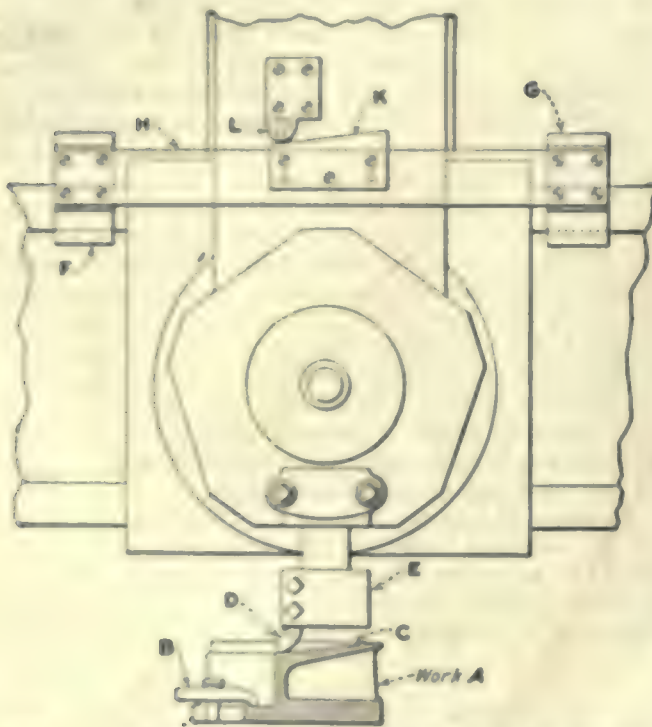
GENERATING A TAPER SURFACE BY USING A FORM PLATE CARRIED ON THE RAIL
